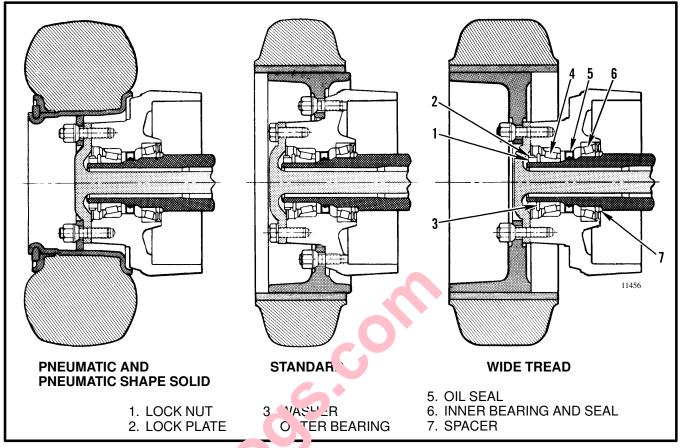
DRIV W IELL MOUNTS, E/J1.25–1.75XL (E25–35XL)
